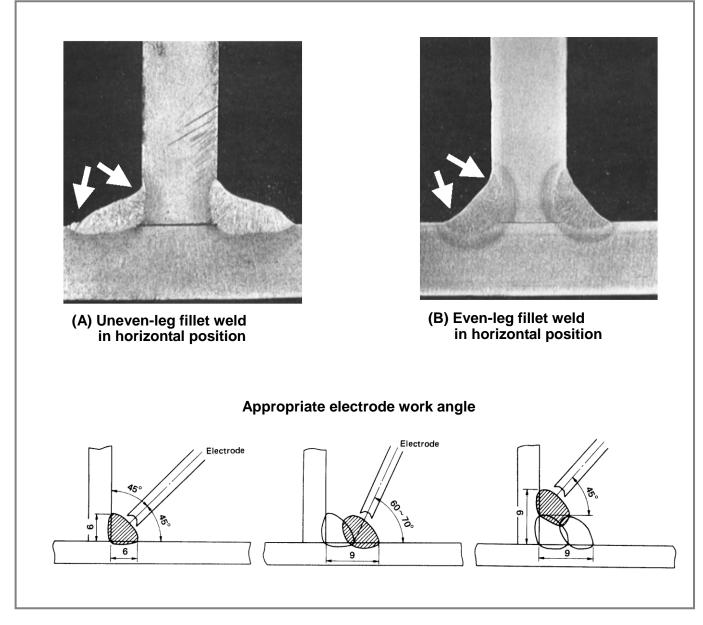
UNEVEN-LEG FILLET WELD
